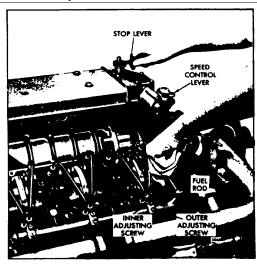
Positioning No. 3L Injector Rack Control Lever
